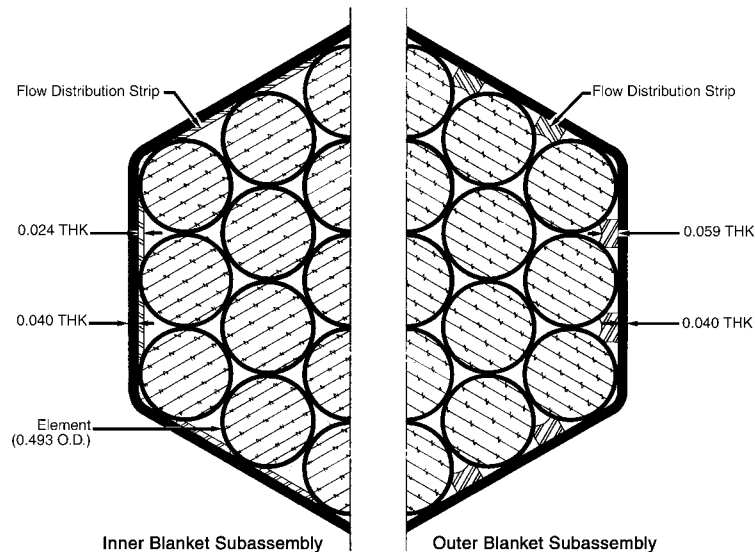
INNER BLANKET AND OUTER BLANKET SUBASSEMBLIES.
